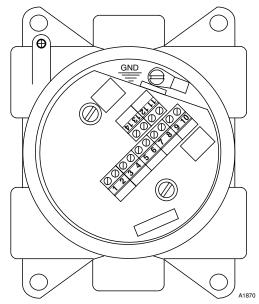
IDC Terminal Wiring Board Mounted in Six-Port Junction Box
